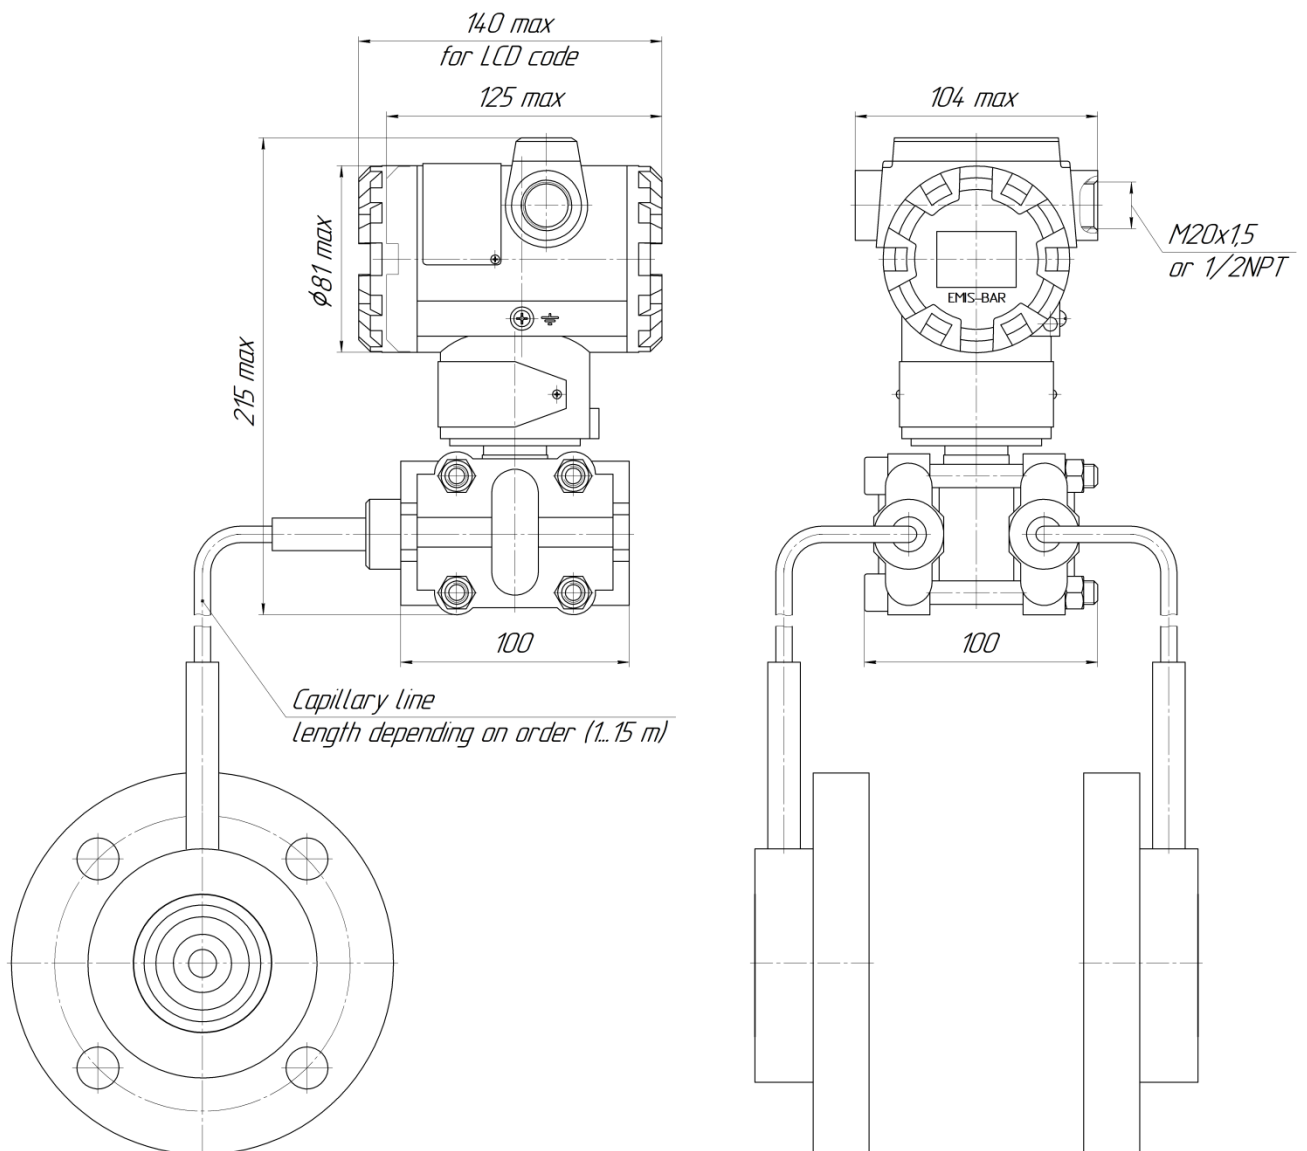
Dimensions and connection sizes of special version of traditional-mount pressure transmitters EMIS-BAR 183 and 186. Flange sizes are given in the pages 73-76.
